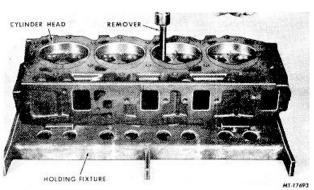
Using SE-1722 Remover and SE-1889 Holding Fixture to Remove Valve Guides
